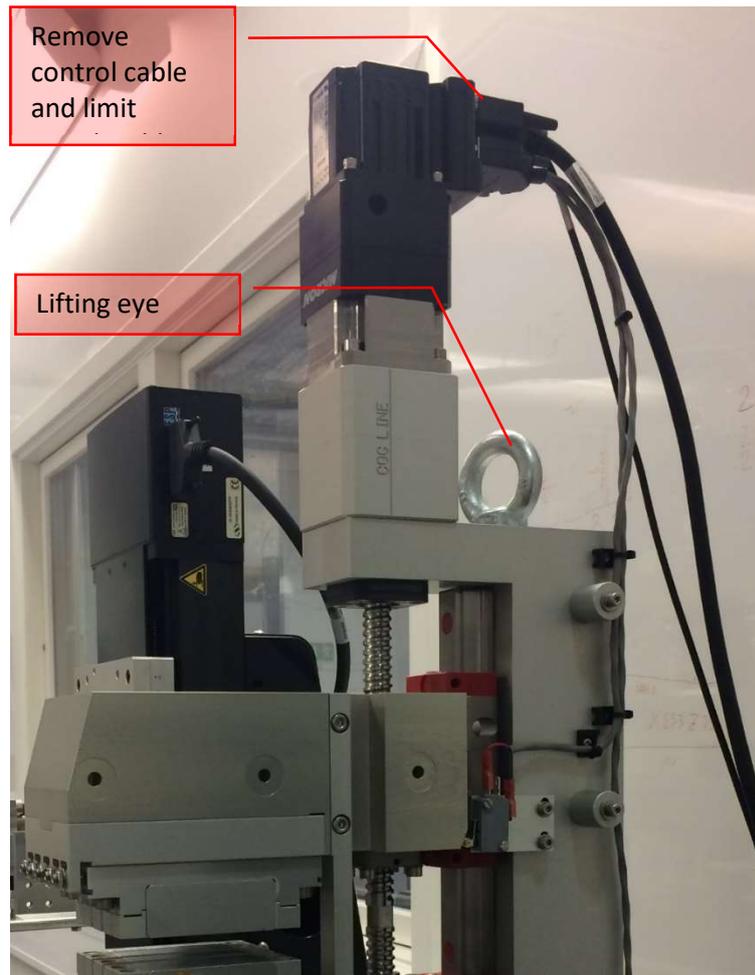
Cables that shall be removed before lifting + lifting eye.
